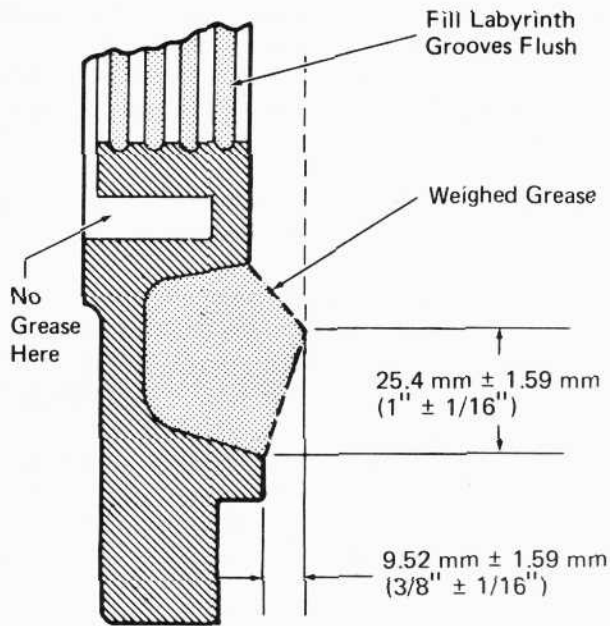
Bearing And Collector Ring Assembly Cross-Section
